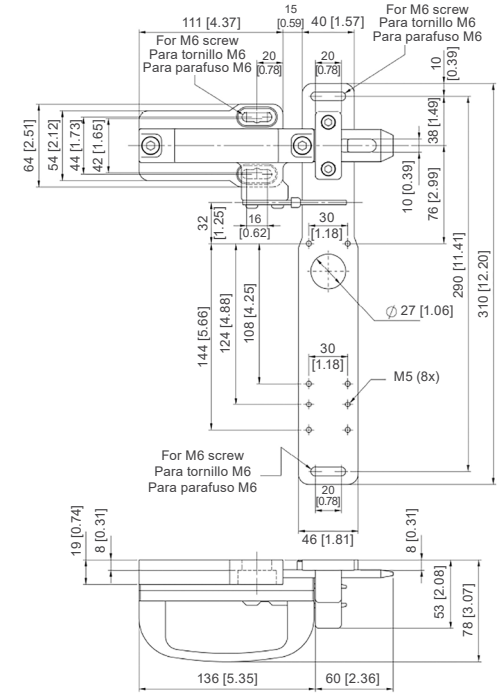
ASISW-TOS1 dimensions in mm [in]
